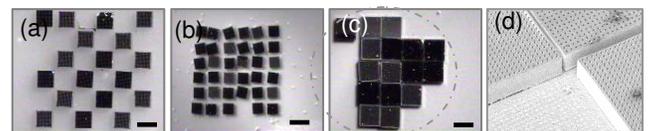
(a-c) Various parts are assembled and transferred to Reprorubber© substrate. The bar is 800 μm in all 3 images. (a) 600 μm size parts assembled on traps made of an array of alternating 600 μm and 580 μm traps. (b) 400 μm size parts assembled in alternating 600/580 μm 6*6 traps. (c) 780 μm parts assembled in alternating 800/780 μm traps (the partial array fill is due to use of small antistatic cylinder). The density of packing for this case is close to 92%. (d) 780 μm parts also can be transferred from the PDMS layer to solder defined substrate using thermo-compression flip chip bonding.
